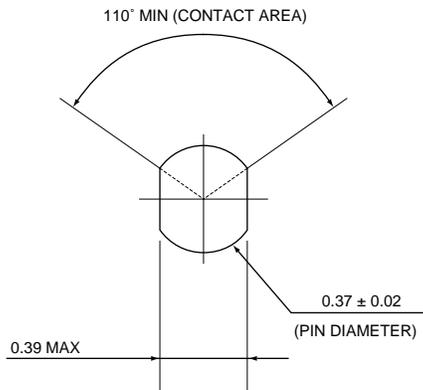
Full-size PC Card Host Connector, Pin Contacts
